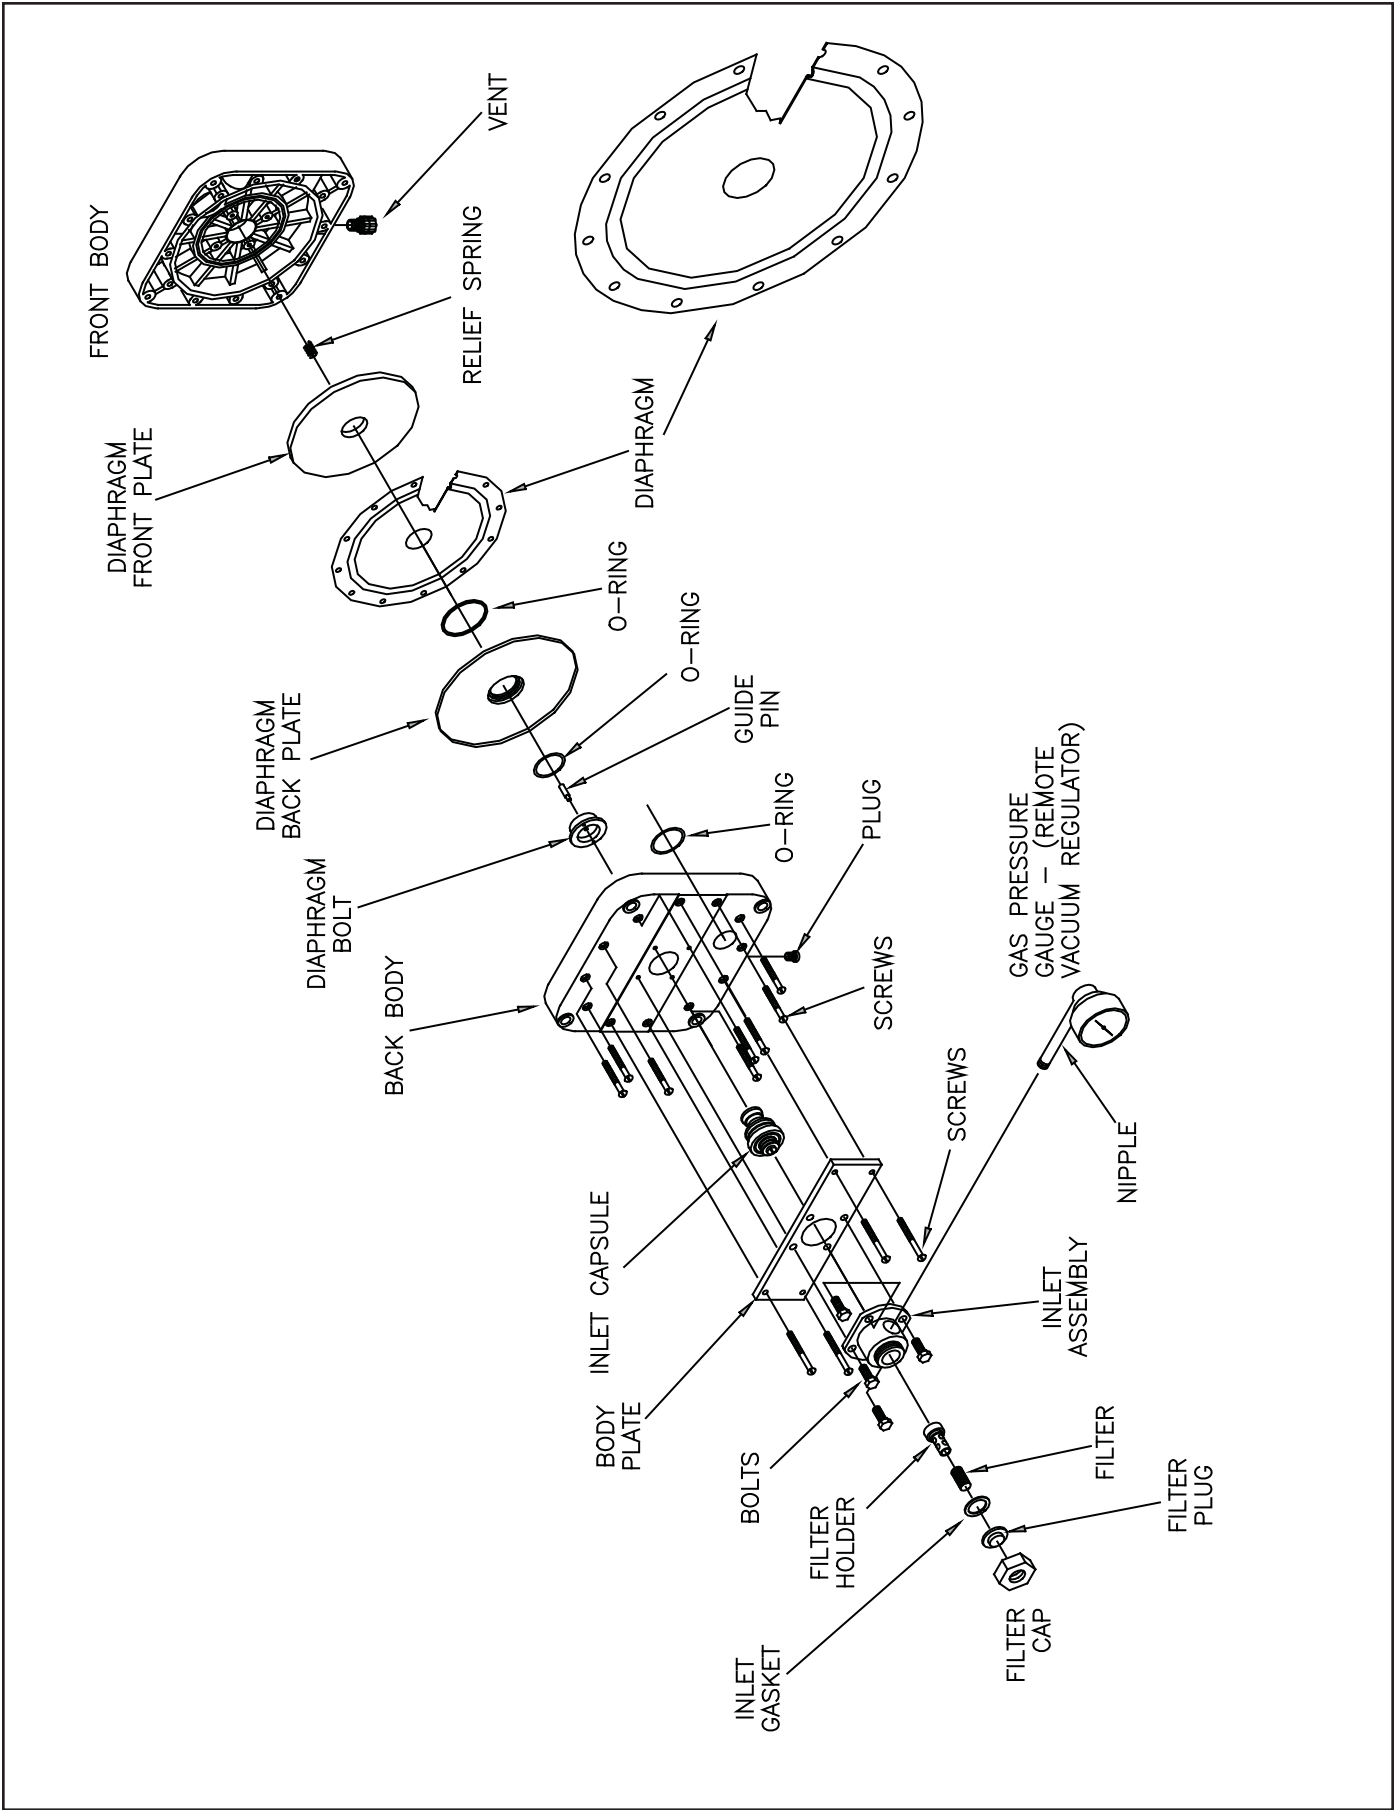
2000 PPD (40 kg/h) Vacuum Regualtor Assembly
